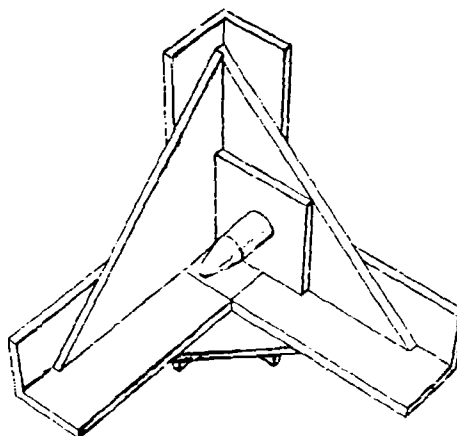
Dowel pin arrangement for riveted or bolted gusset
